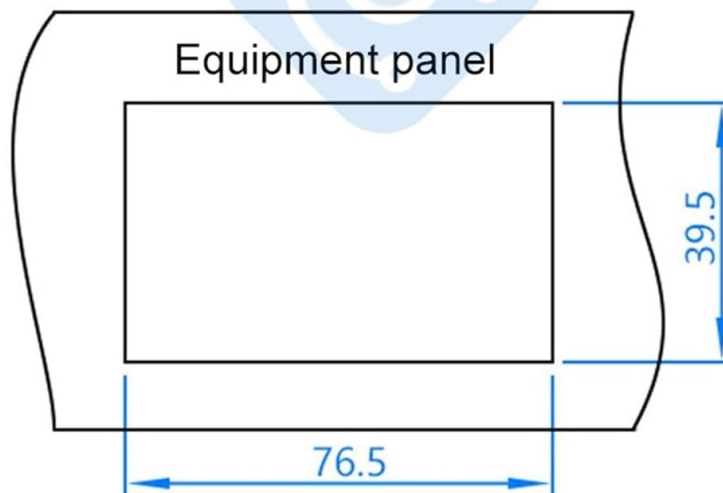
Panel cutout dimensions for installing the H56CH Coulomb Meter.
